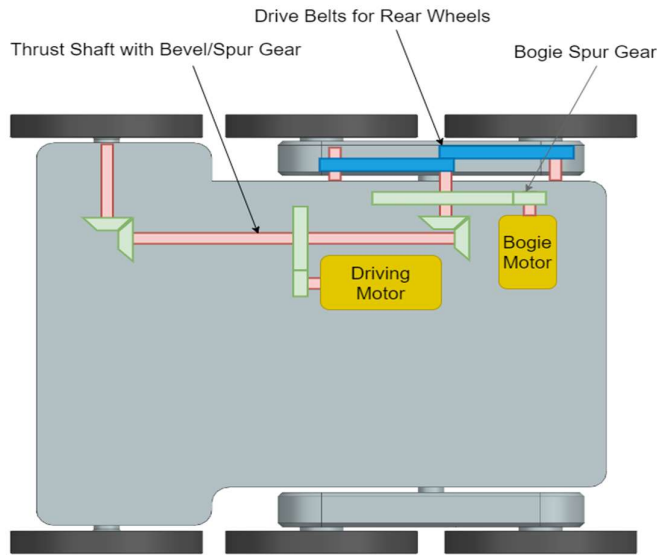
General mechanism scheme of 6-wheel ADR (Top half view) – Rear wheel combined
